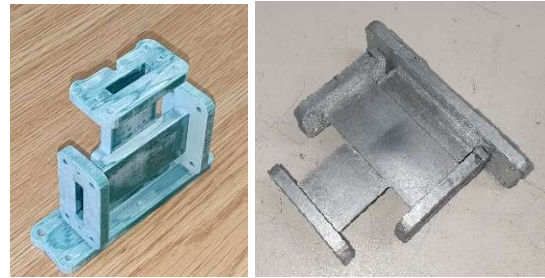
3d printed wax impression of the magic tee & investment casting of the magic tee
